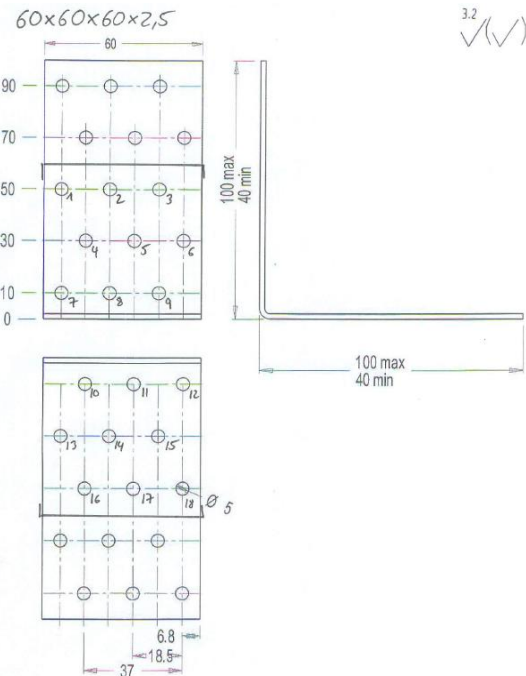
Dimensions of angle bracket 60x60x60x2,5
